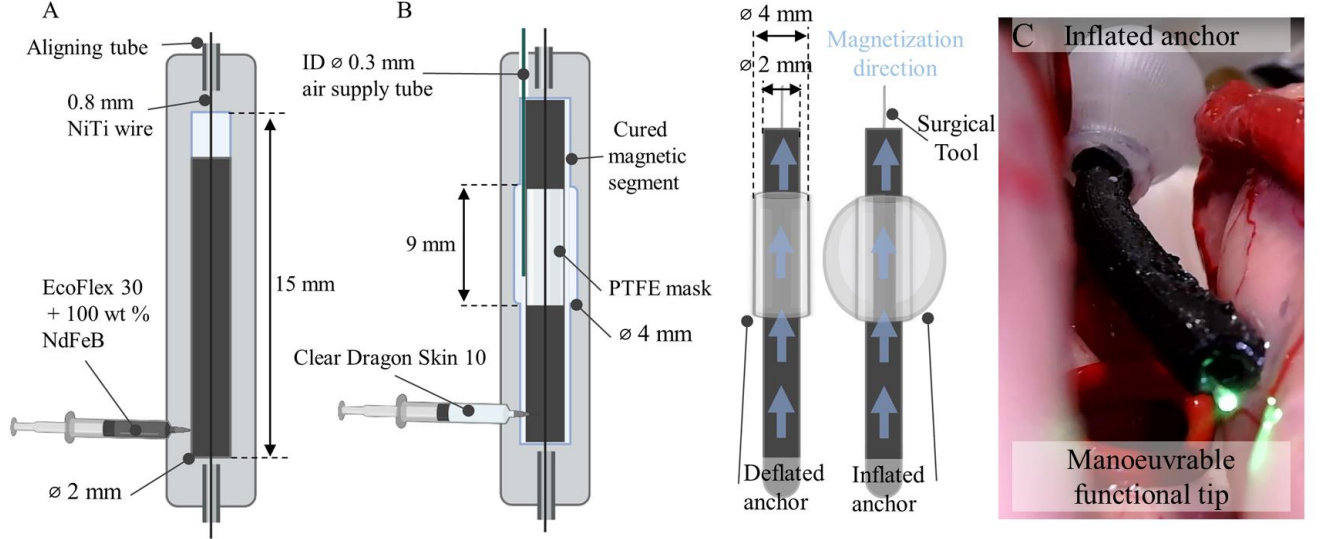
A. Molding process of the 2 mm magnetic core with a tool channel. B. Molding process of the pneumatic chamber, by injecting a layer of clear silicone over the cured magnetic core, in a secondary mold with cavity for chamber of 4 mm in diameter. C. Prototyped SMM with the deployed anchor and laser fiber in the tool channel.
